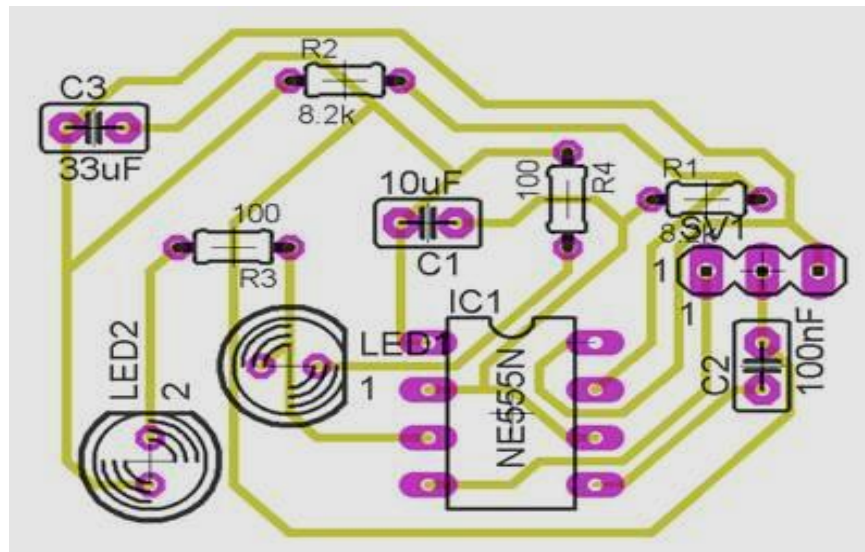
Printed circuit board layout for LED flashing user alert circuit
